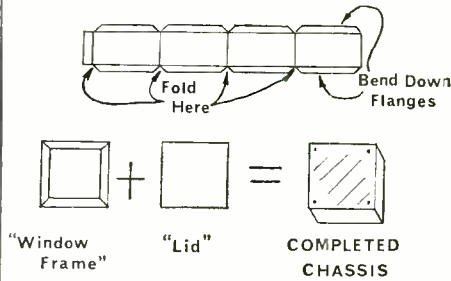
Chassis fabrication is simple, involving only two pieces of metal, one of which is shaped into the main housing. The other is the top lid, cut to size.
